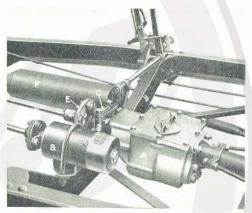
The Centre of the 11 h.p. "Standard" Chassis. A—Gearbox. B—Starting motor. C—Spherical trumion support of gearbox. D—Clutch shaft. E—Flexible universal joint. F—Silencer,
